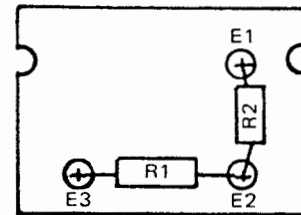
PLATE ASSEMBLY A2A12A3 P/N 1928-4245
